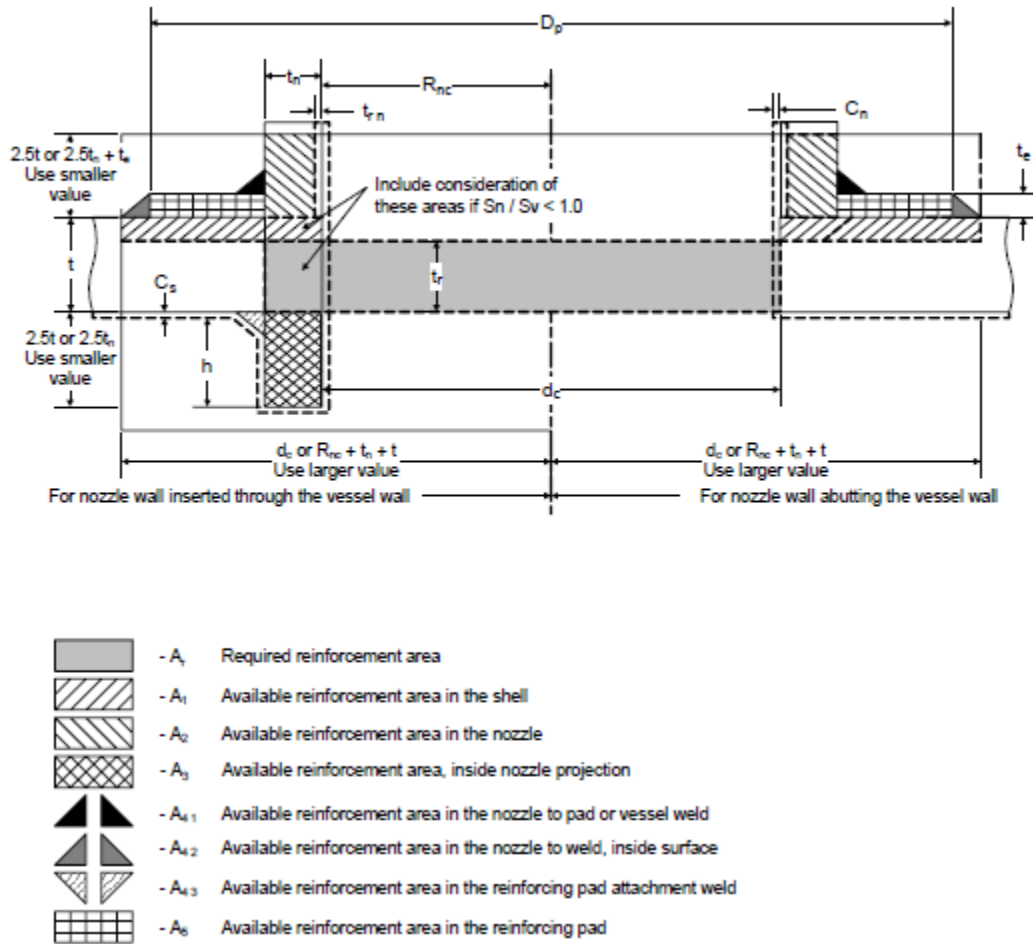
Typical pipe-branch connection areas for Area Replacement Method of API 579 [4]
